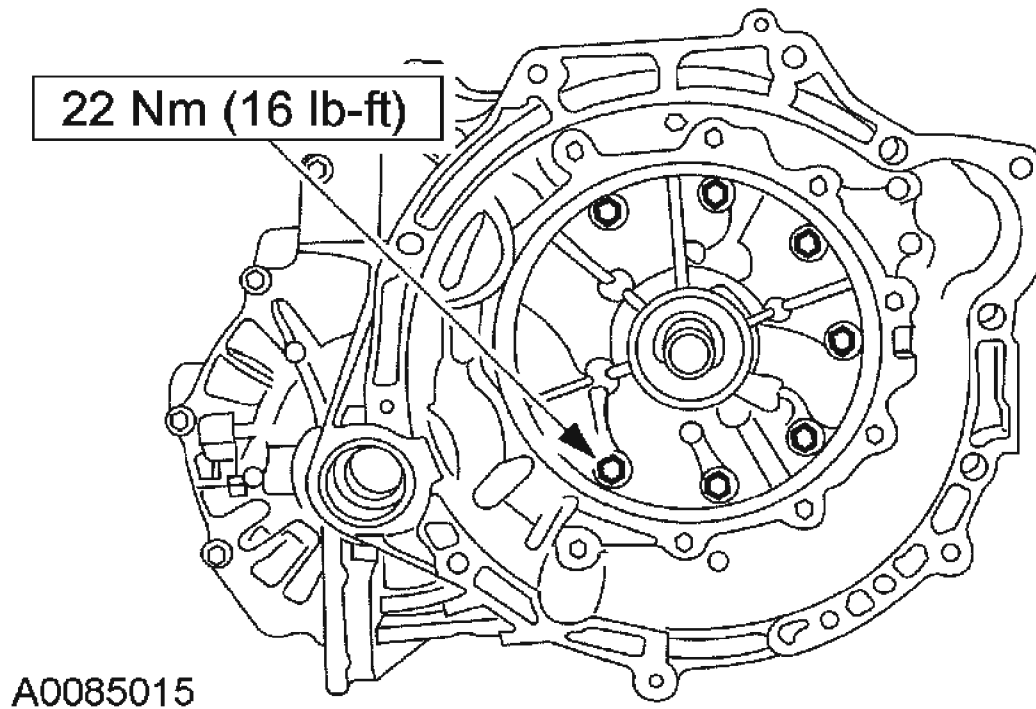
Tightening Fluid Pump Bolts In An Alternating Sequence
